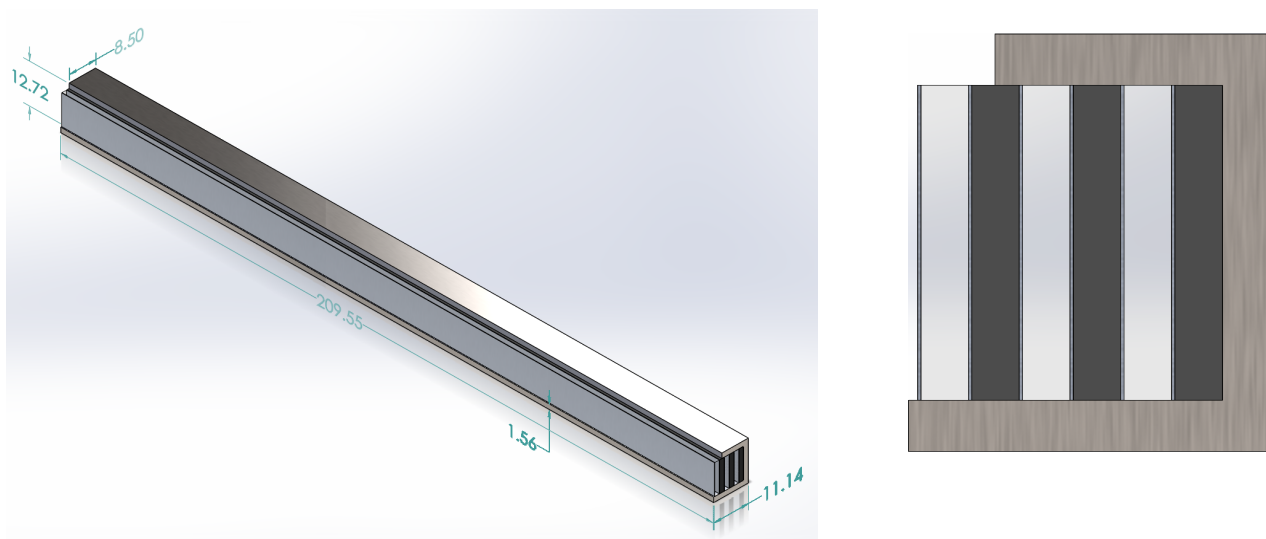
(left) and Figure 14 (right): View of proposed side damper, with dimensions in millimeters.
